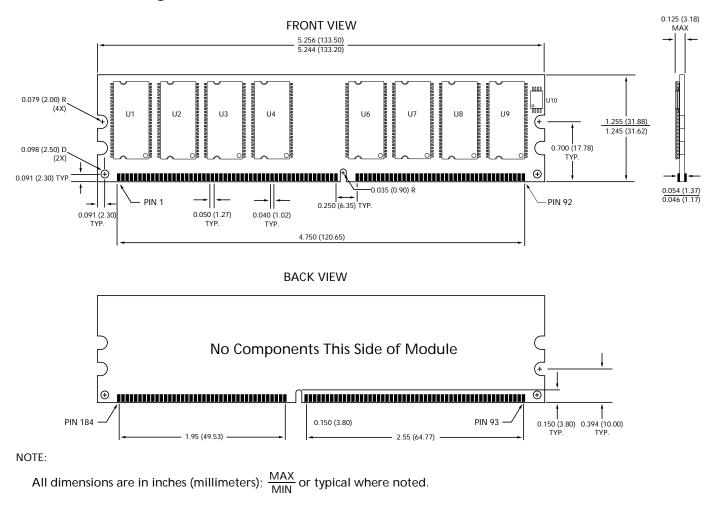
184-Pin DIMM Dimensions – Standard PCB
